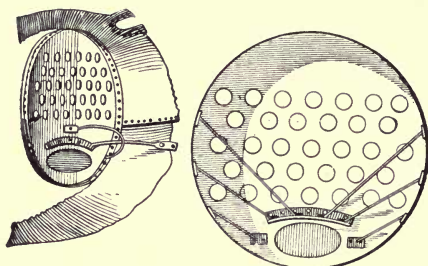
REAR END OF BOILER AFTER EXPLOSION. REAR END OF BOILER BEFORE EXPLOSION.
